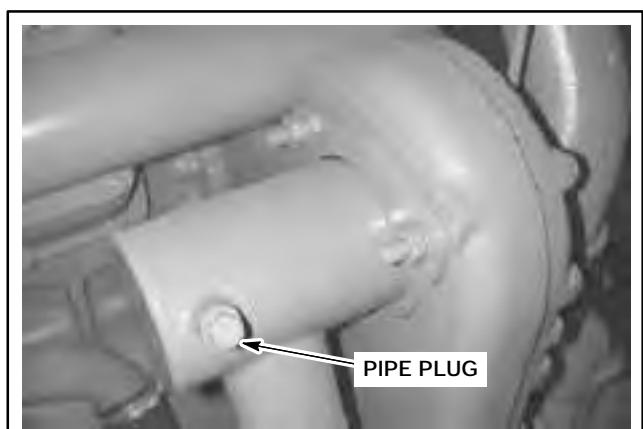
Previous Upper Oil Separator Inlet Tube
